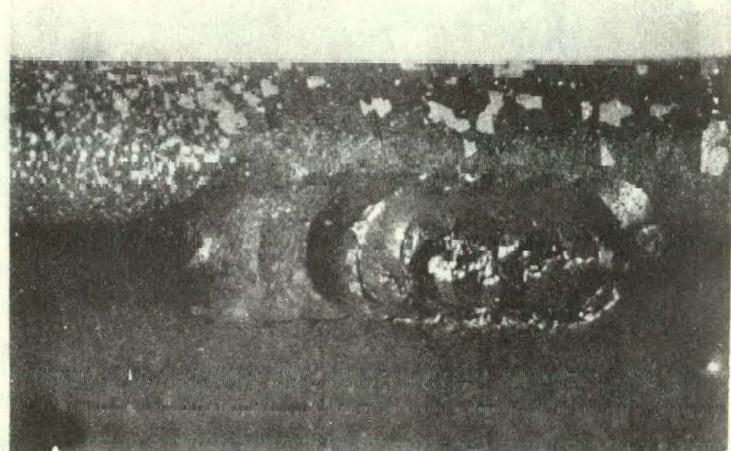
Weld shown in Figure 11 after one additional 1700°F test.
